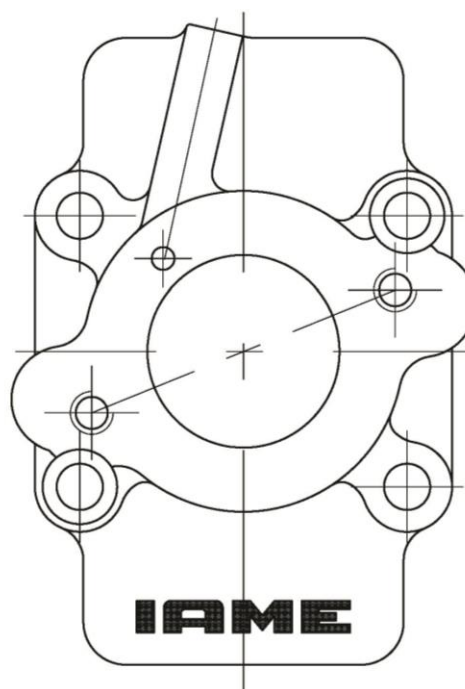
PHOTO IDENTIFICATION CARBURETTOR INLET CONVEYOR
